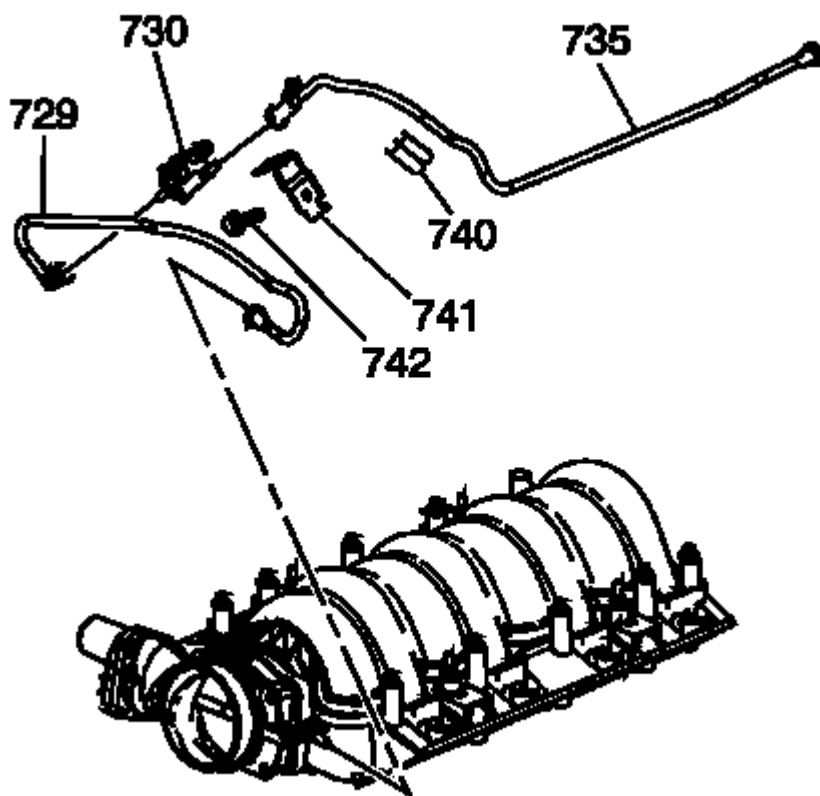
EVAP Clip, Bolt, Bracket, Valve & Tubes
